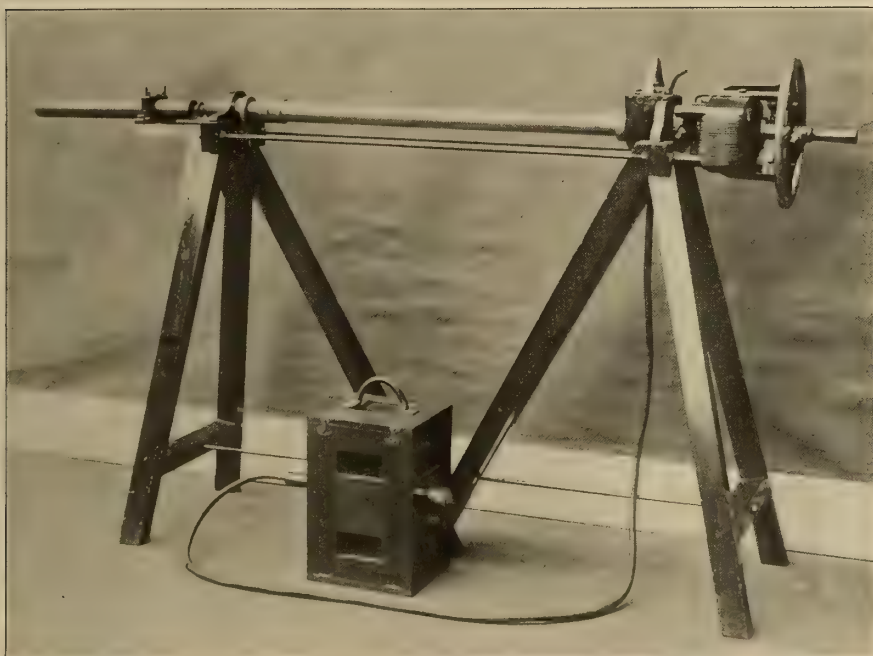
AN ELECTRIC TUBE-CUTTER.
